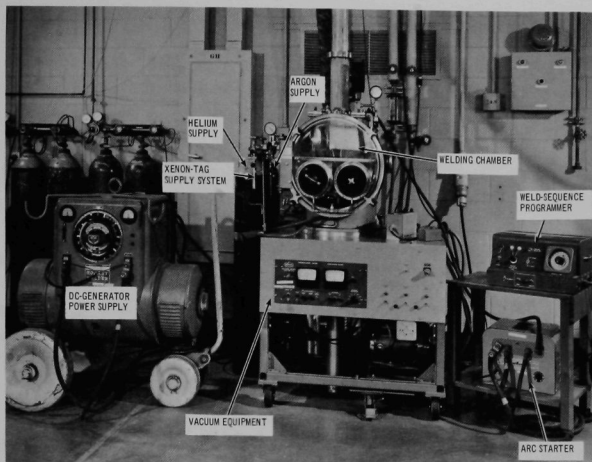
Welding Equipment That Made Final End Closures on Fuel-element Assemblies and Capsules for Subassembly XX01.
